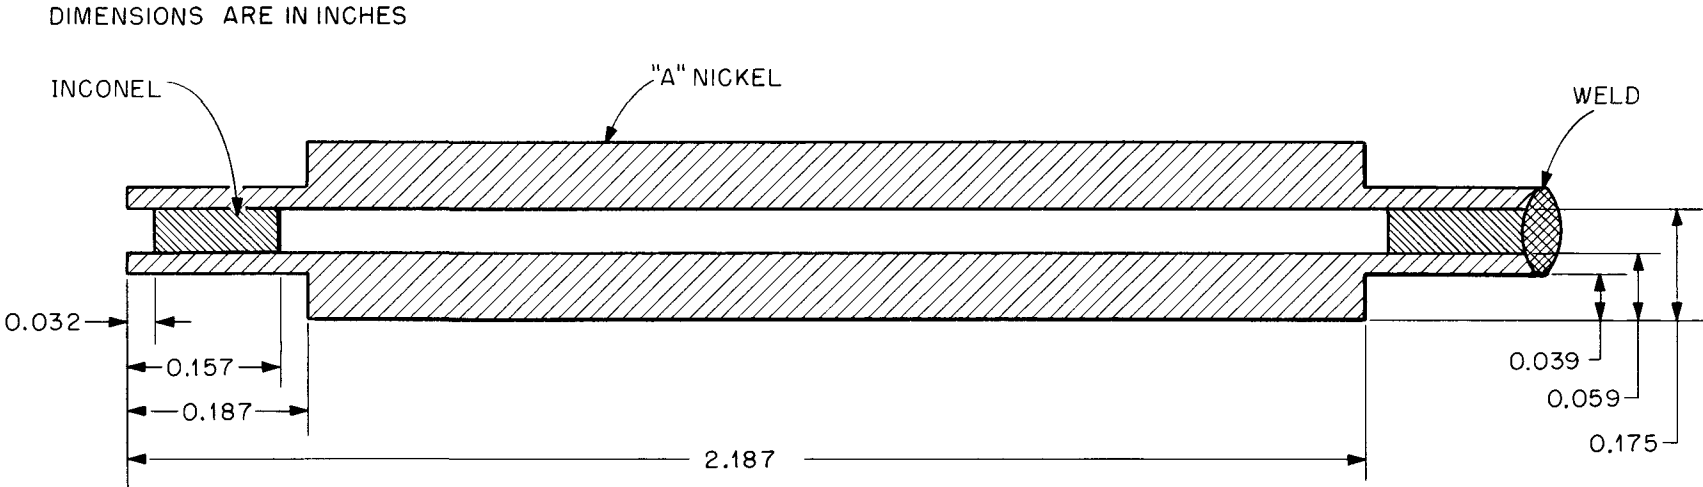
Cross-Sectional View of Typical Rectangular Test Section.
